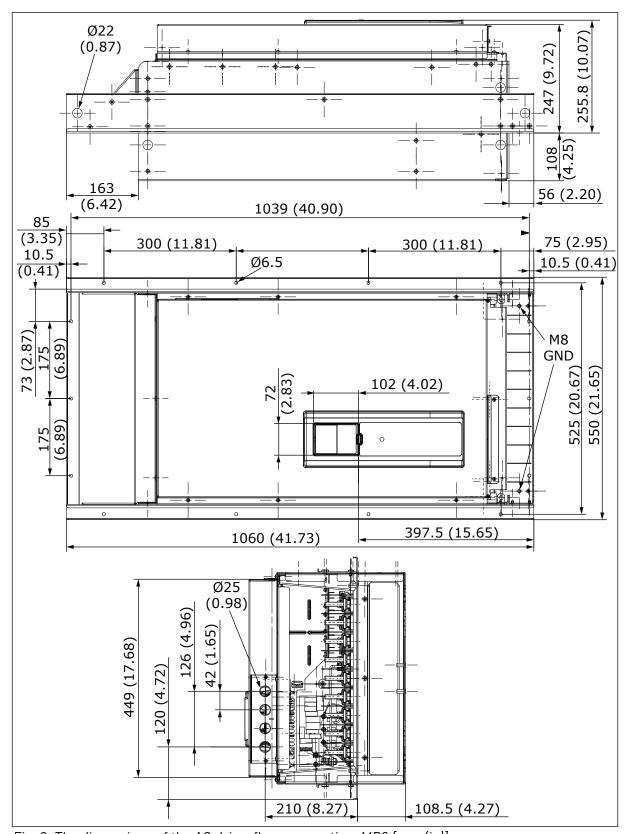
The dimensions of the AC drive, flange mounting, MR9 [mm (in)]
